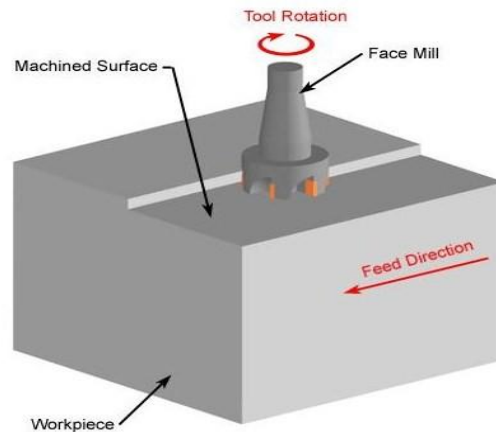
Machining operation, face mill (from custompartnet.com)
